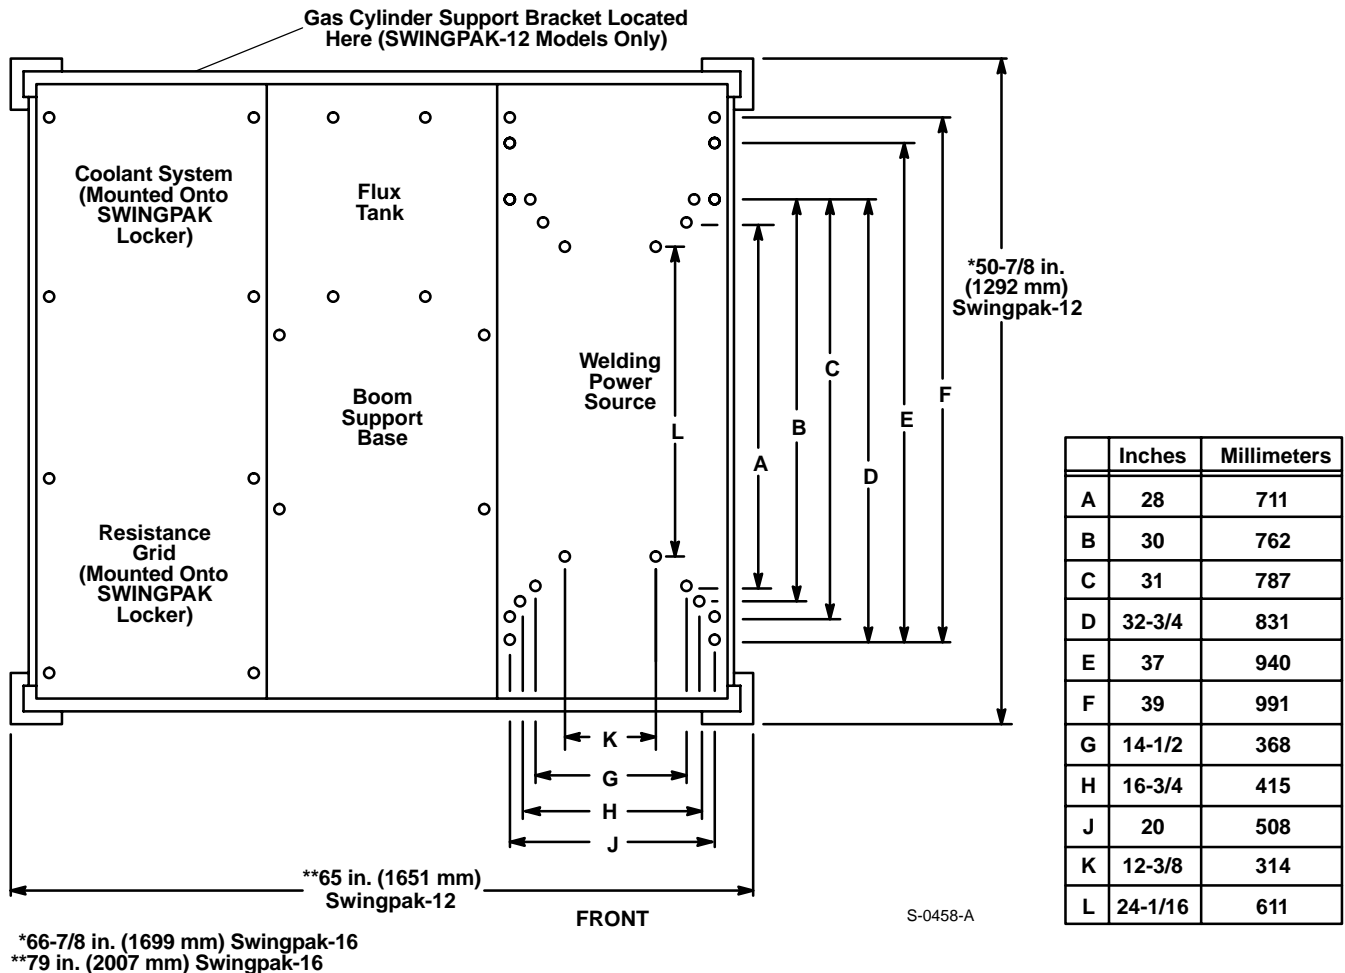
Overall Dimensions, Mounting Hole Layout, And Component Locations
